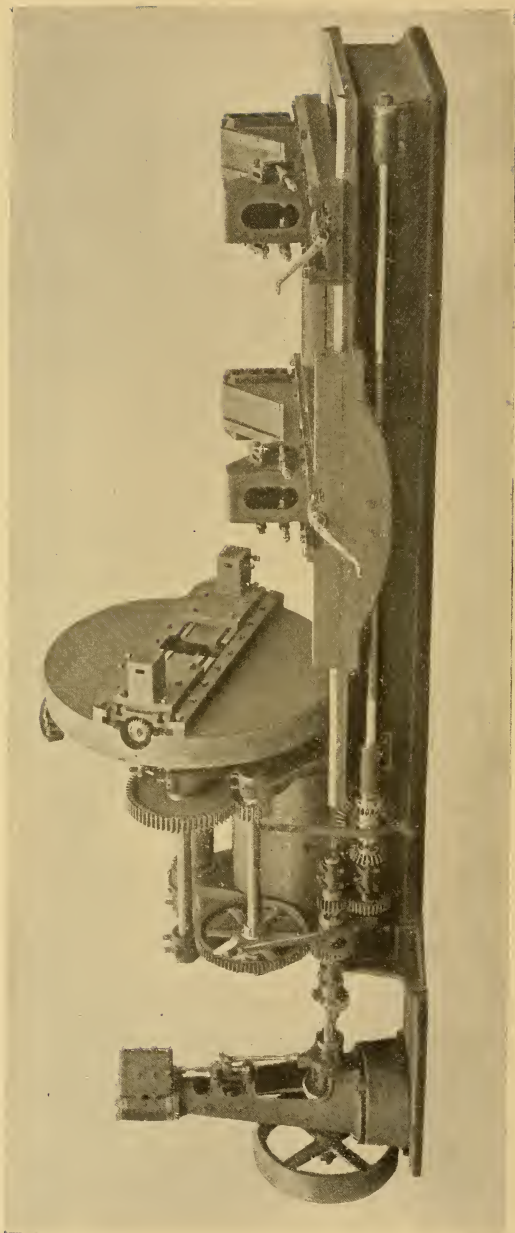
MACHINE FOR CUTTING LARGE PIPE.
